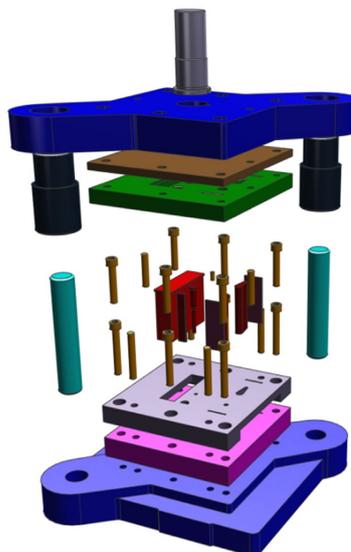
3D exploded view of the multi-station progressive die for blanking and punching
